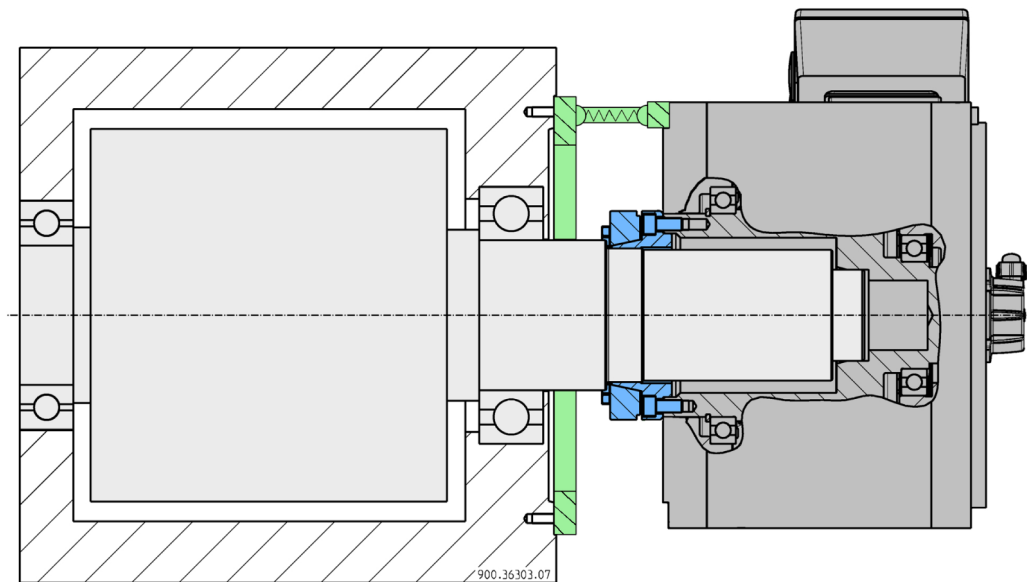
Decoupling the stator from the machine base using a torque arm (schematic representation)
